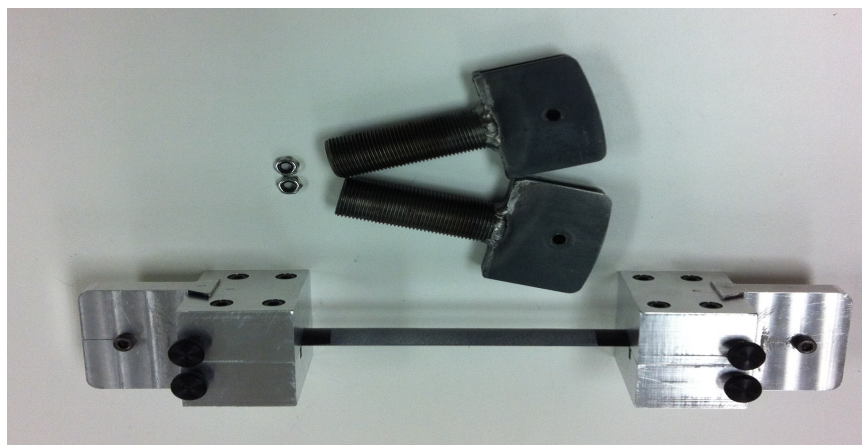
Assembled Configuration of Test Fixture Set-up
